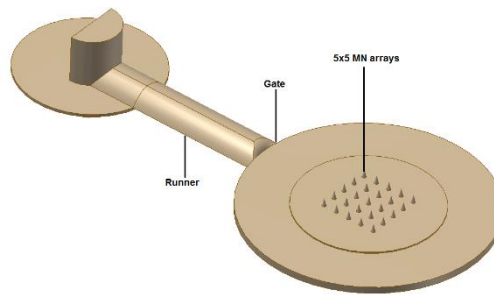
3D view of the moulded MN part, modelled using CAD software.
